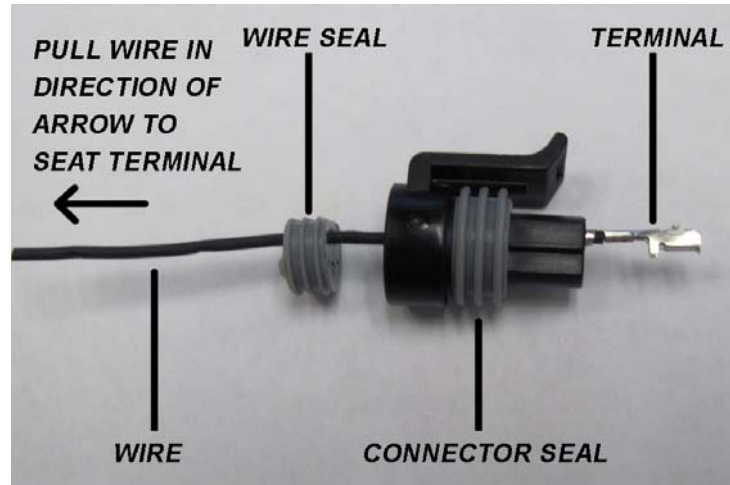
Connector Assembly Showing Pull to Seat Terminal
